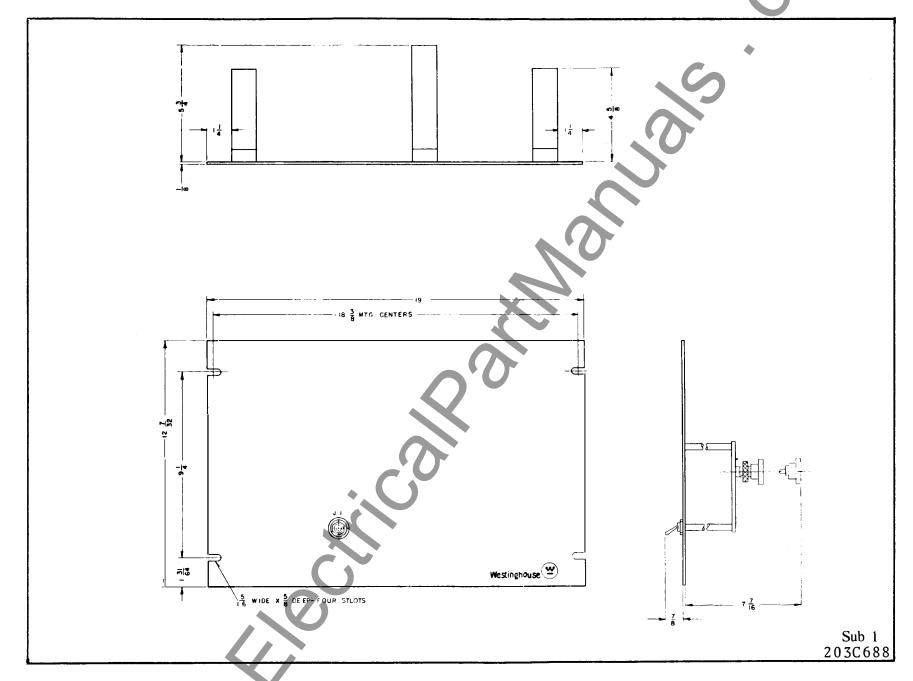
Outline and Drilling Plan for the Type TCF Transmitter Assembly.
